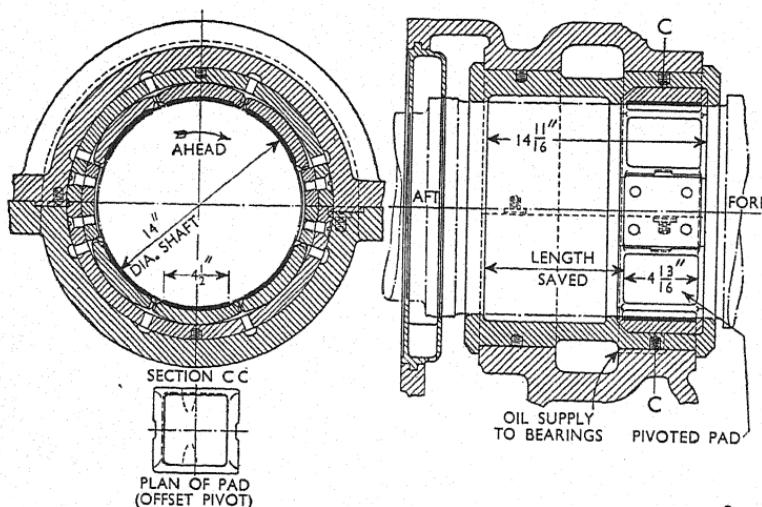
Conversion of Main Gearwheel Bearing in the S.S. *Gouverneur Général Chanzy*, showing Saving of Space by Using Pivoted Pads
